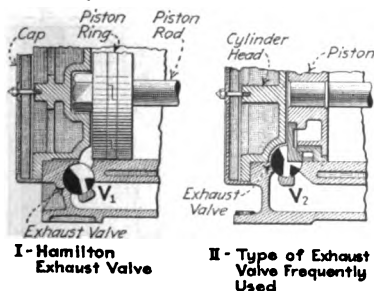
Detaching Corliiss-engine exhaust valves. (Hooven, Owens, Rentschler Co. In the Hamilton construction, V_1 , the valve does not rock into the cylinder space, where, should the valve gear break, it might wreck the engine.)
